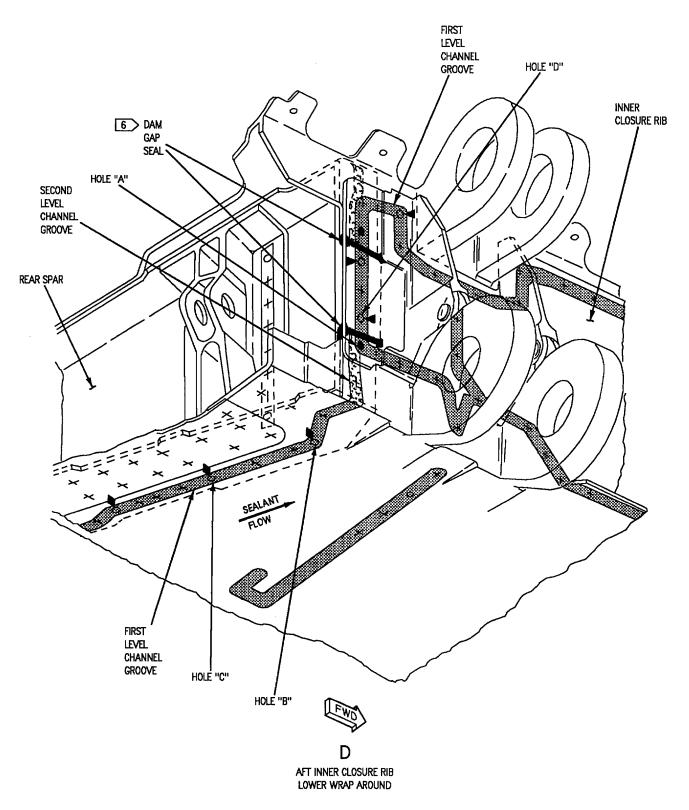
Closure Rib Channel Groove Seal Injection (Sheet 5)
